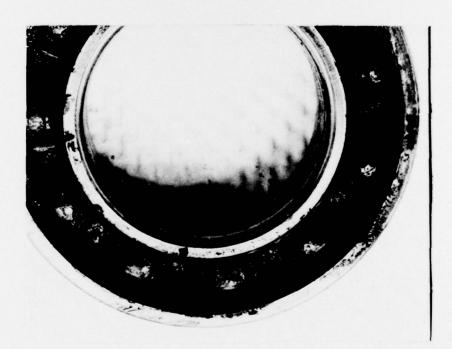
Bearing S/N TRL-39. 2.5x Enlarged View.
